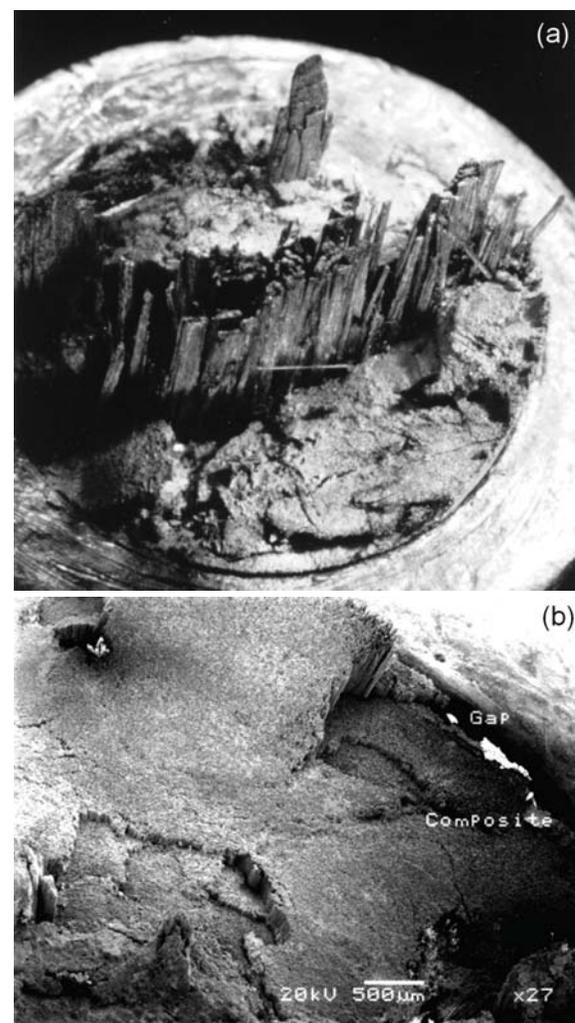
Failure characteristics of overcrimped 115kV insulator; (a) macro-damage zone and (b) composite fracture surface.
